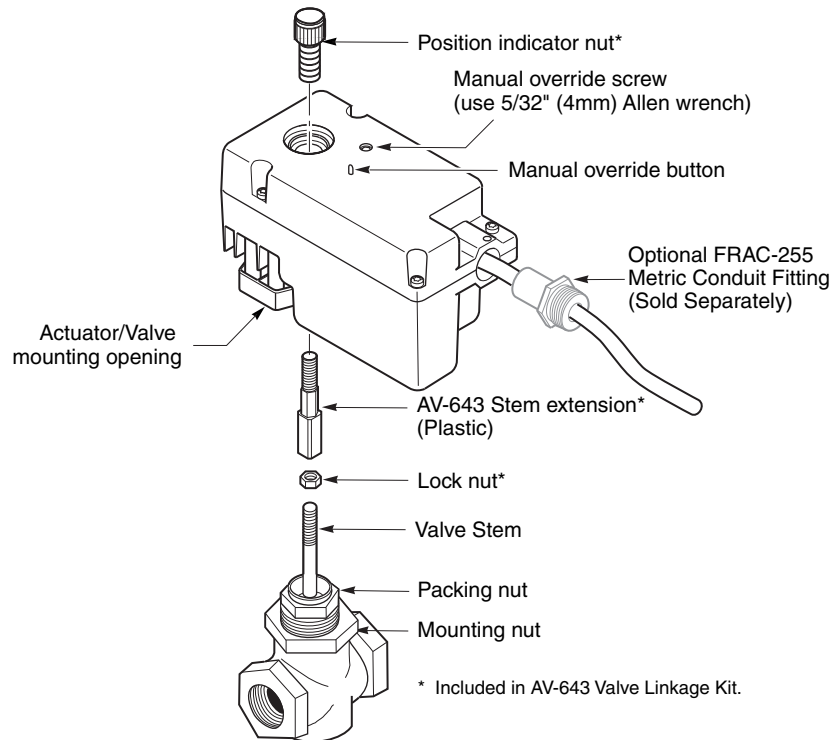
MF-22xx3 Series and MS-22353 Actuator Assembly Diagram with Obsolete AV-643 Linkage.
